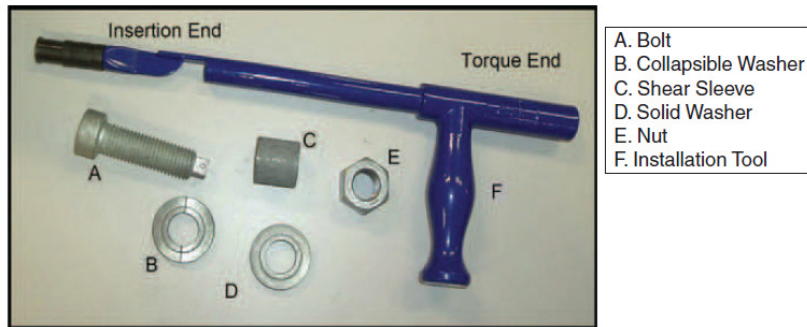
Parts of the fastener system Ajax ONESIDE and installation tool [13]
